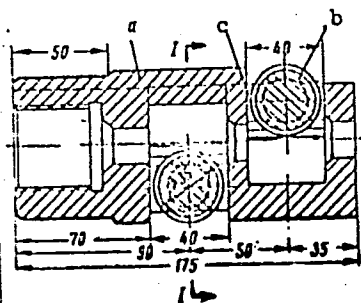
Arrangement of rolls in a separator with two roll sets: a - separator; b - roll; c - spacer.
